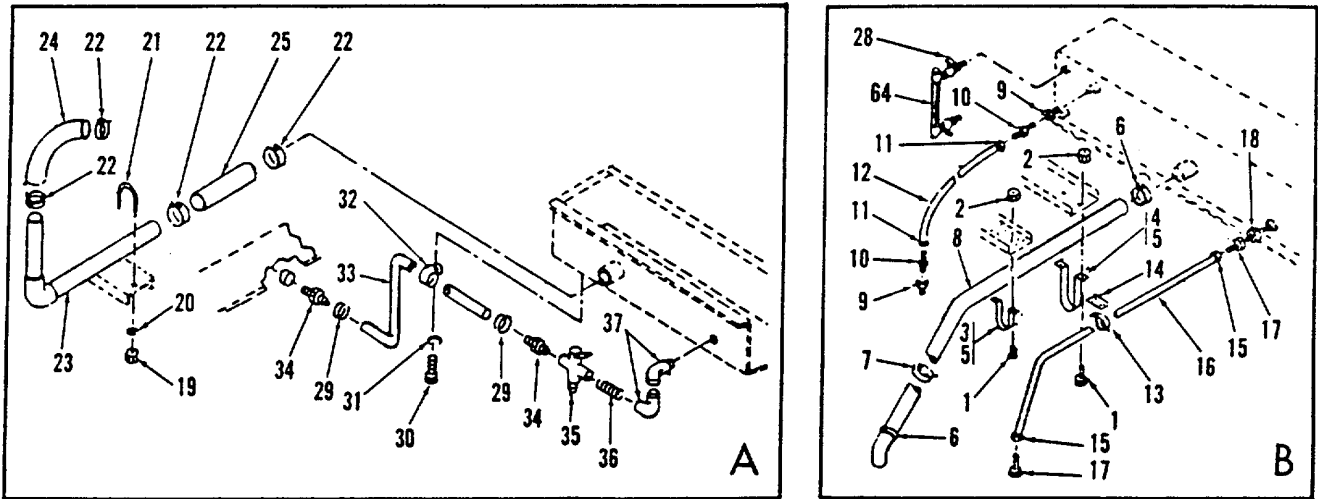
Radiator Assembly, Code B, Exploded View (Sheet 2 of 2)
